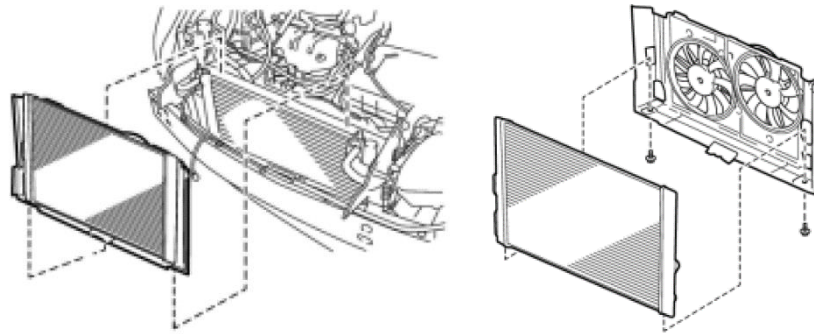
Toyota Prius: Radiator and Fan shroud assembly
